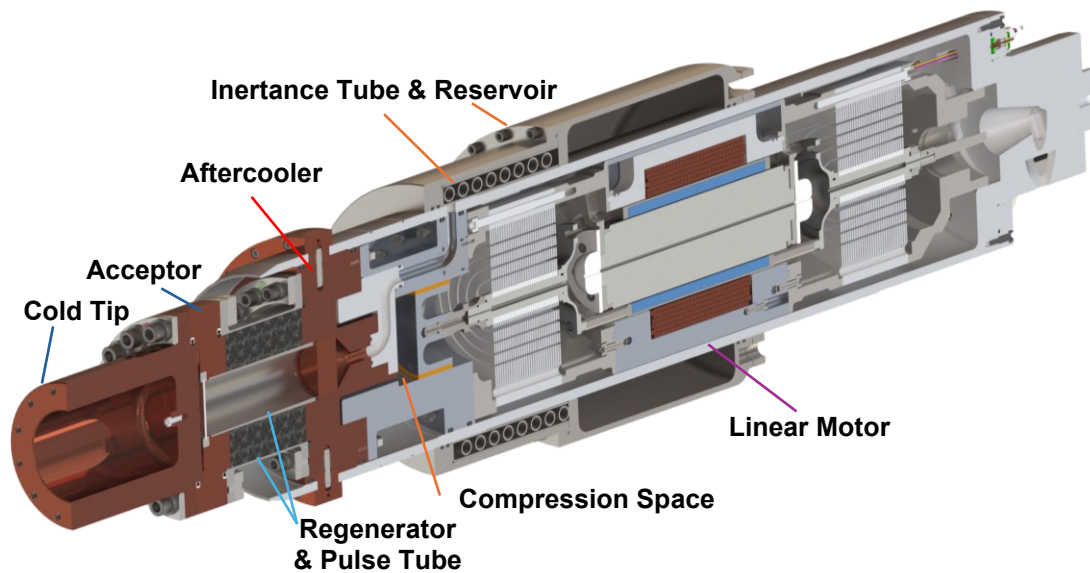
Cross section of the co-axial pulse tube cryocooler.
